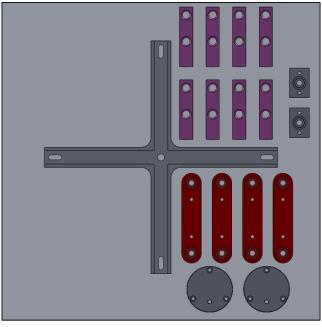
Layout of CNC Waterjet Abrasion Cutting
